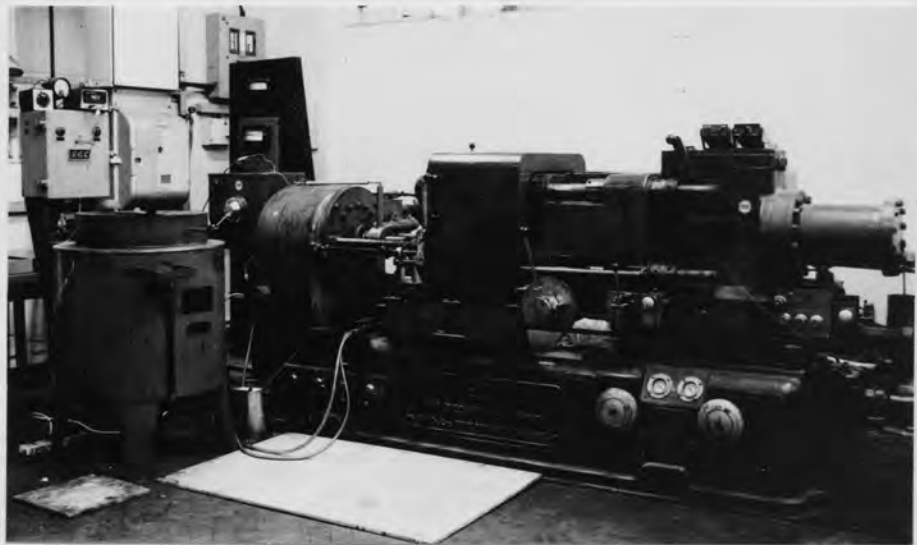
E.M.B 10B Cold-Chamber Pressure Diecast Machine.
